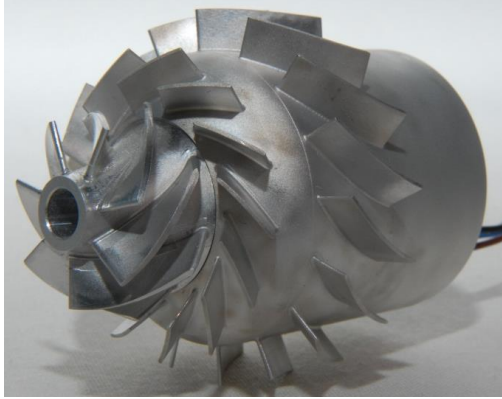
Prototype of compressor A, showing mixed flow impeller, vaned diffuser, axial de-swirl vanes and enclosed electric motor with a length of 85 mm, and overall diameter of 60 mm
